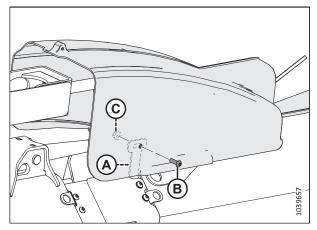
Left Outboard Linkage Cover – View from Front of Header
